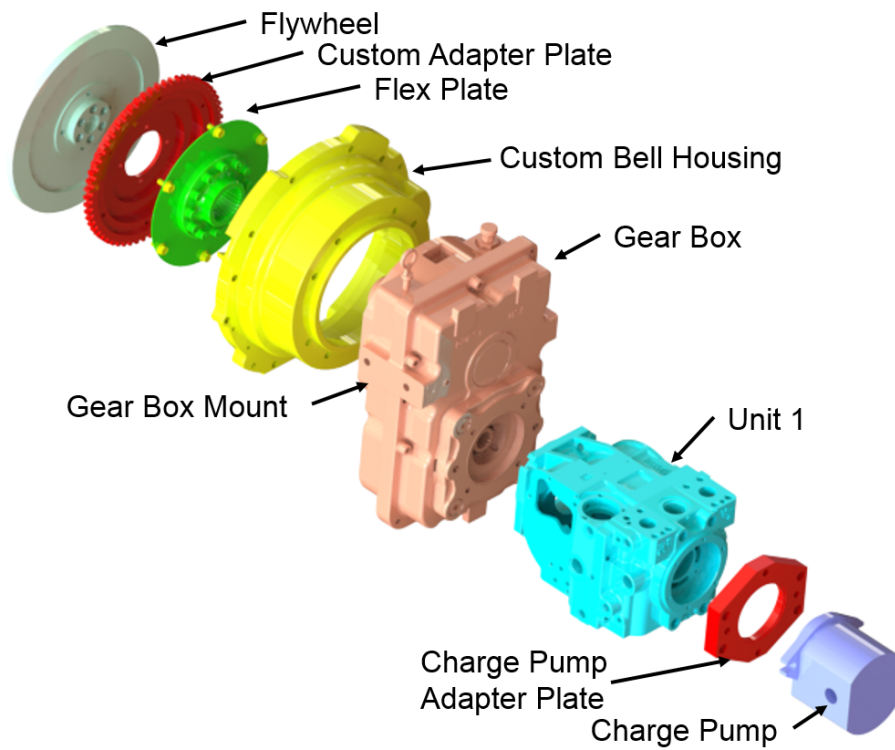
Exploded View of Engine Flywheel to Unit 1 Subassembly.
